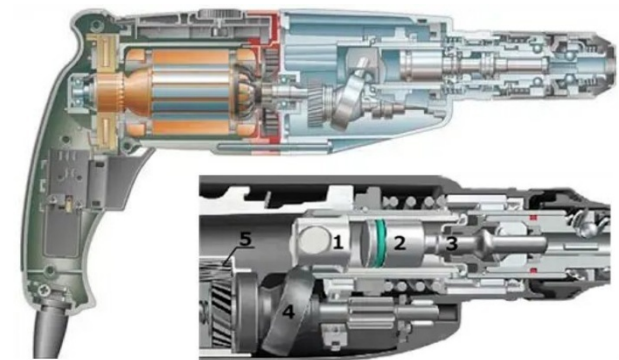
Hammer drill machine [42]: 1) cylinder, 2) piston, 3) striker, 4) swinging bearing, 5) engine gear
